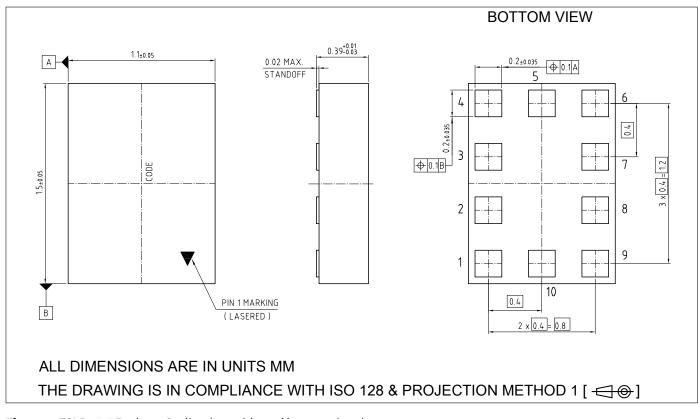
TSLP-10-3 Package Outline (top, side and bottom views)
